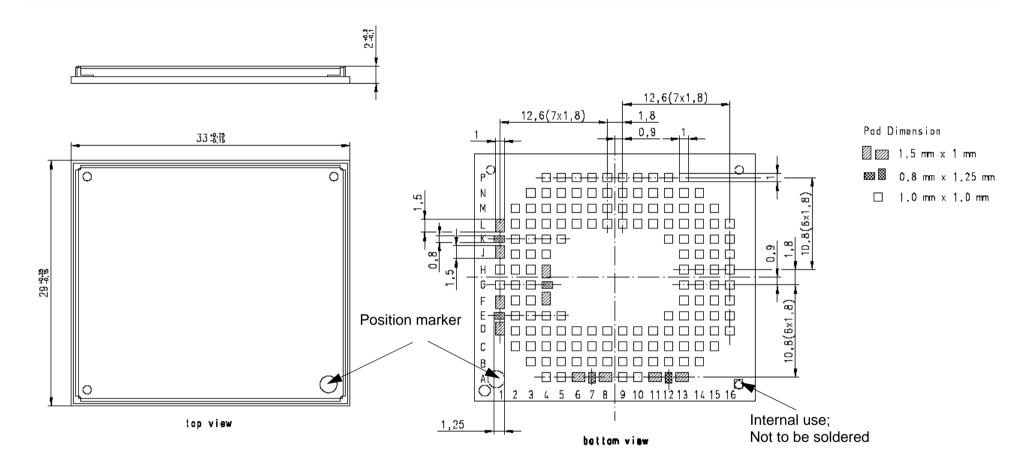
Dimensions of PHS8-P/PHS8-K (all dimensions in mm)
